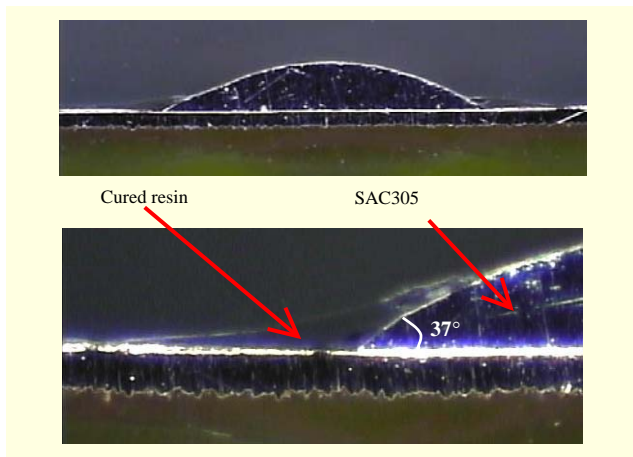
Optical photographs of solder wetting on Cu pads of hybrid underfill with MEC-B and solder powder.
